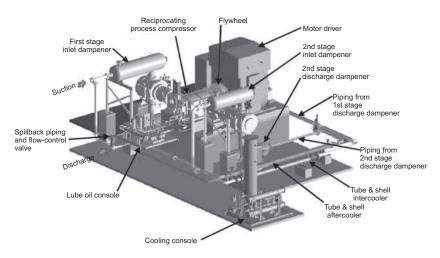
Electric motor block-mounted reciprocating compressor.
